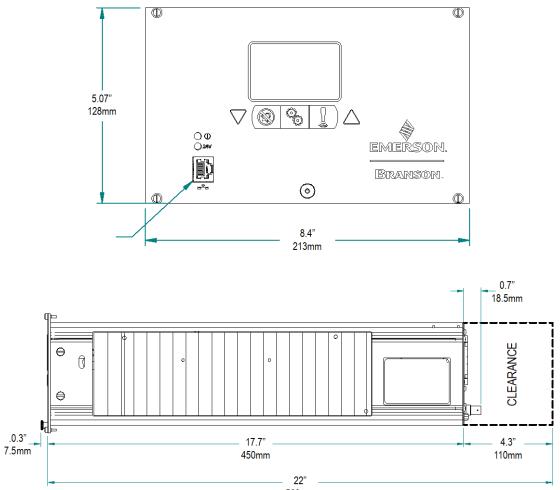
DCX RM S Power Supply Dimensional Drawing (Medium)
